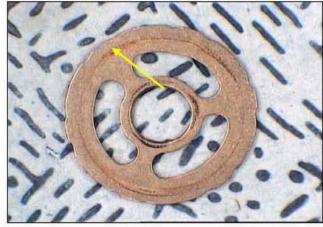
Spring plate, tappet-side (traces of corrosion)
